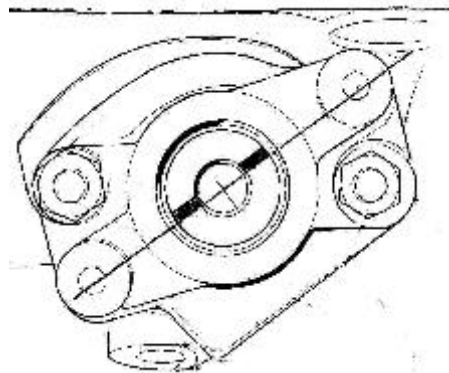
When the gear is properly installed in a 6-cylinder engine, the drive slot is aligned as shown (note the offset).
